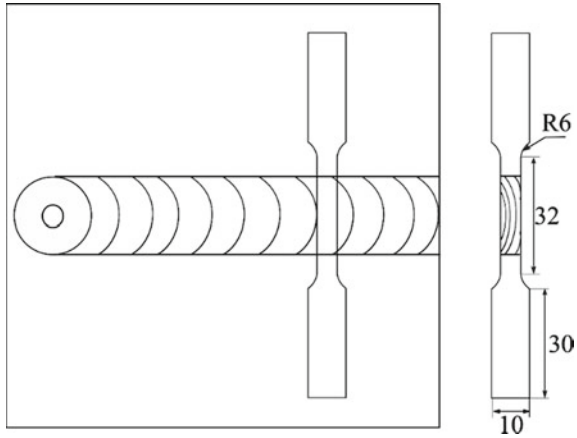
Schematic of the tensile test specimen (all dimensions are in mm)
